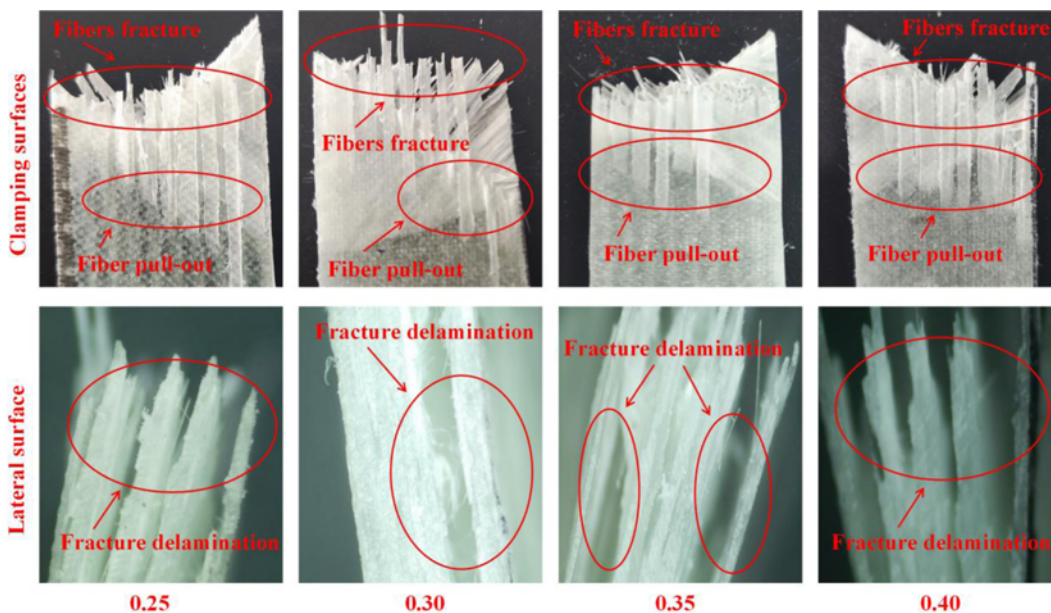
Tensile fracture morphology of the specimens in 0° direction.
